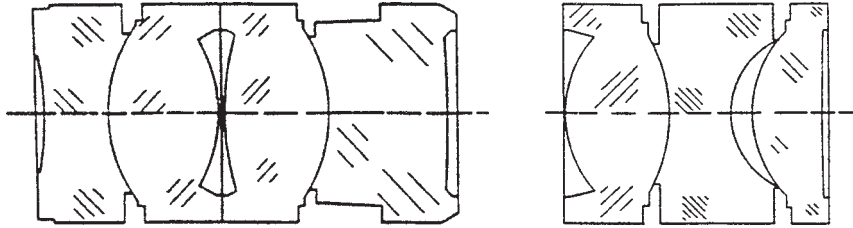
Edge configurations of plastic optical lenses. Left: flange spaced lenses; right: edge contact assembly (both from Ref. [20]). Note the possibility of achieving small airspace and protection of convex optical surfaces by extending the integrated flanges beyond the vertex (left).
